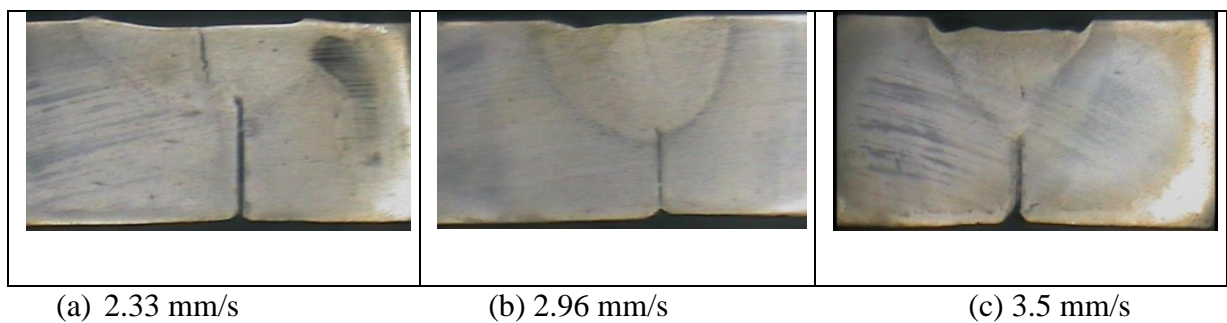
Optical microscopic Image at weld zone of TIG welded specimen with use of TiO_2 flux
